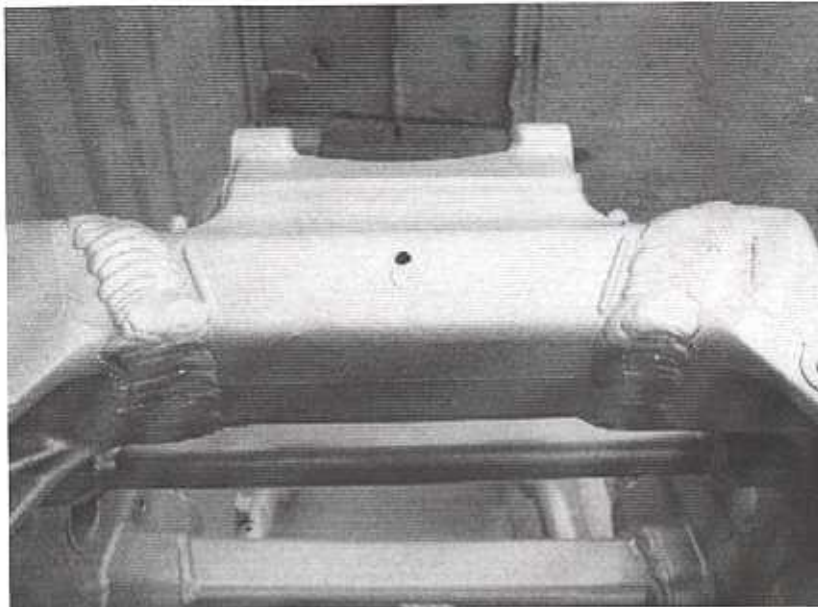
Subject crossmember & Welds – Bottom View
